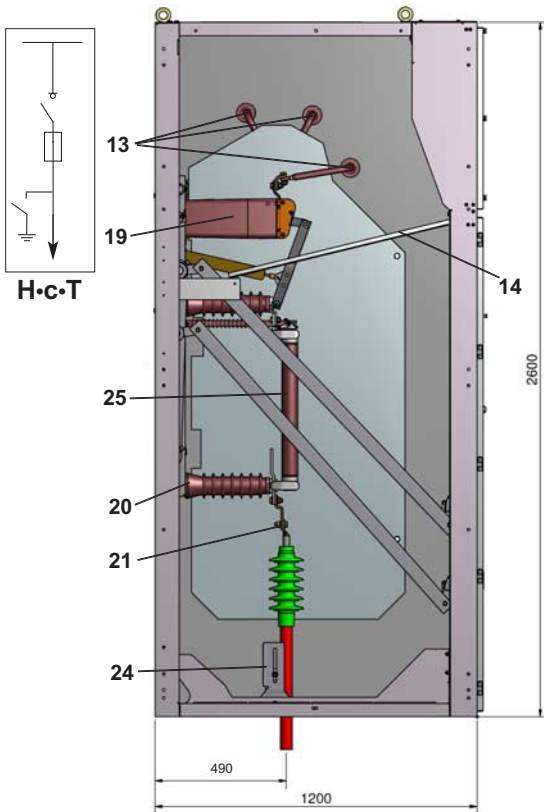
PRO-AIR H-c-T, Type transformer feeder panel
